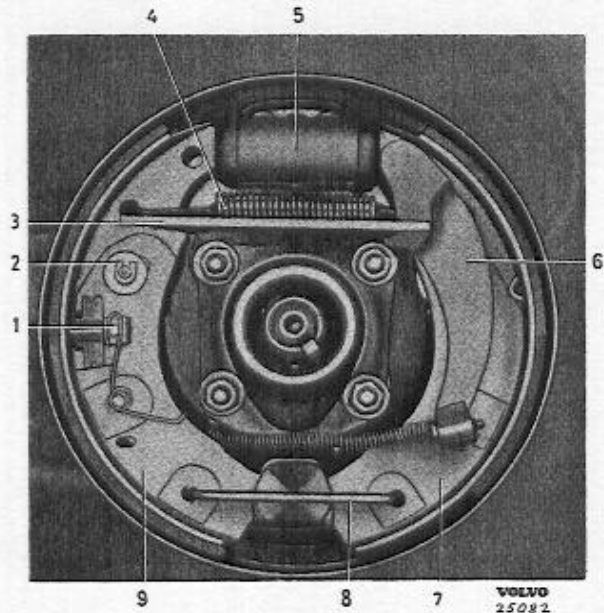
Wheel brake unit, early production, left-hand rear wheel.
